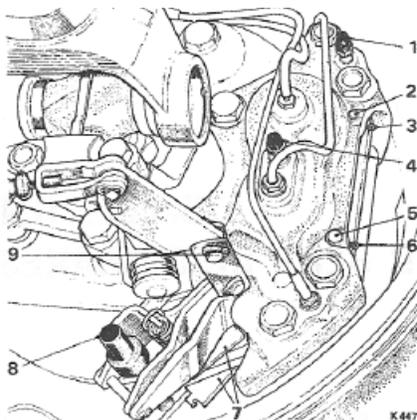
REAR BRAKE CALIPERS (EARLY CARS)
